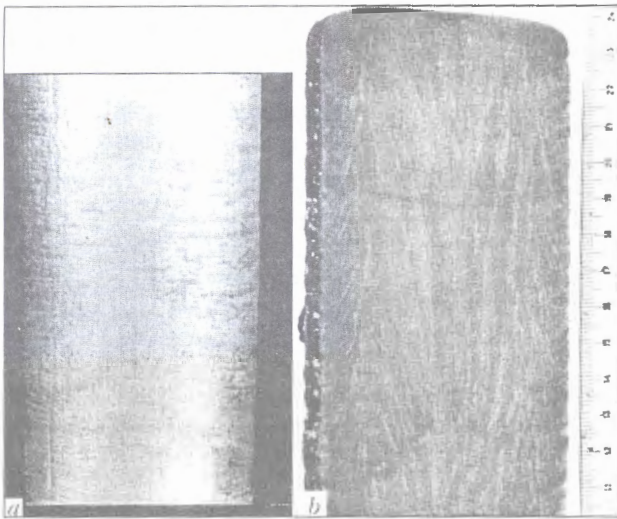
Appearance (a) and longitudinal macrosection (b) of R6M5 steel ingot produced by remelting of high-speed steel chips
